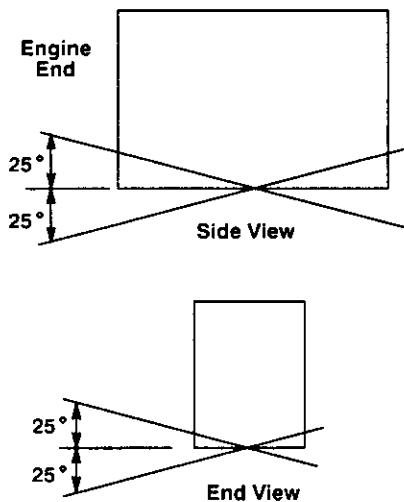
Allowable Tilt Angles For Welding Generator Engine
